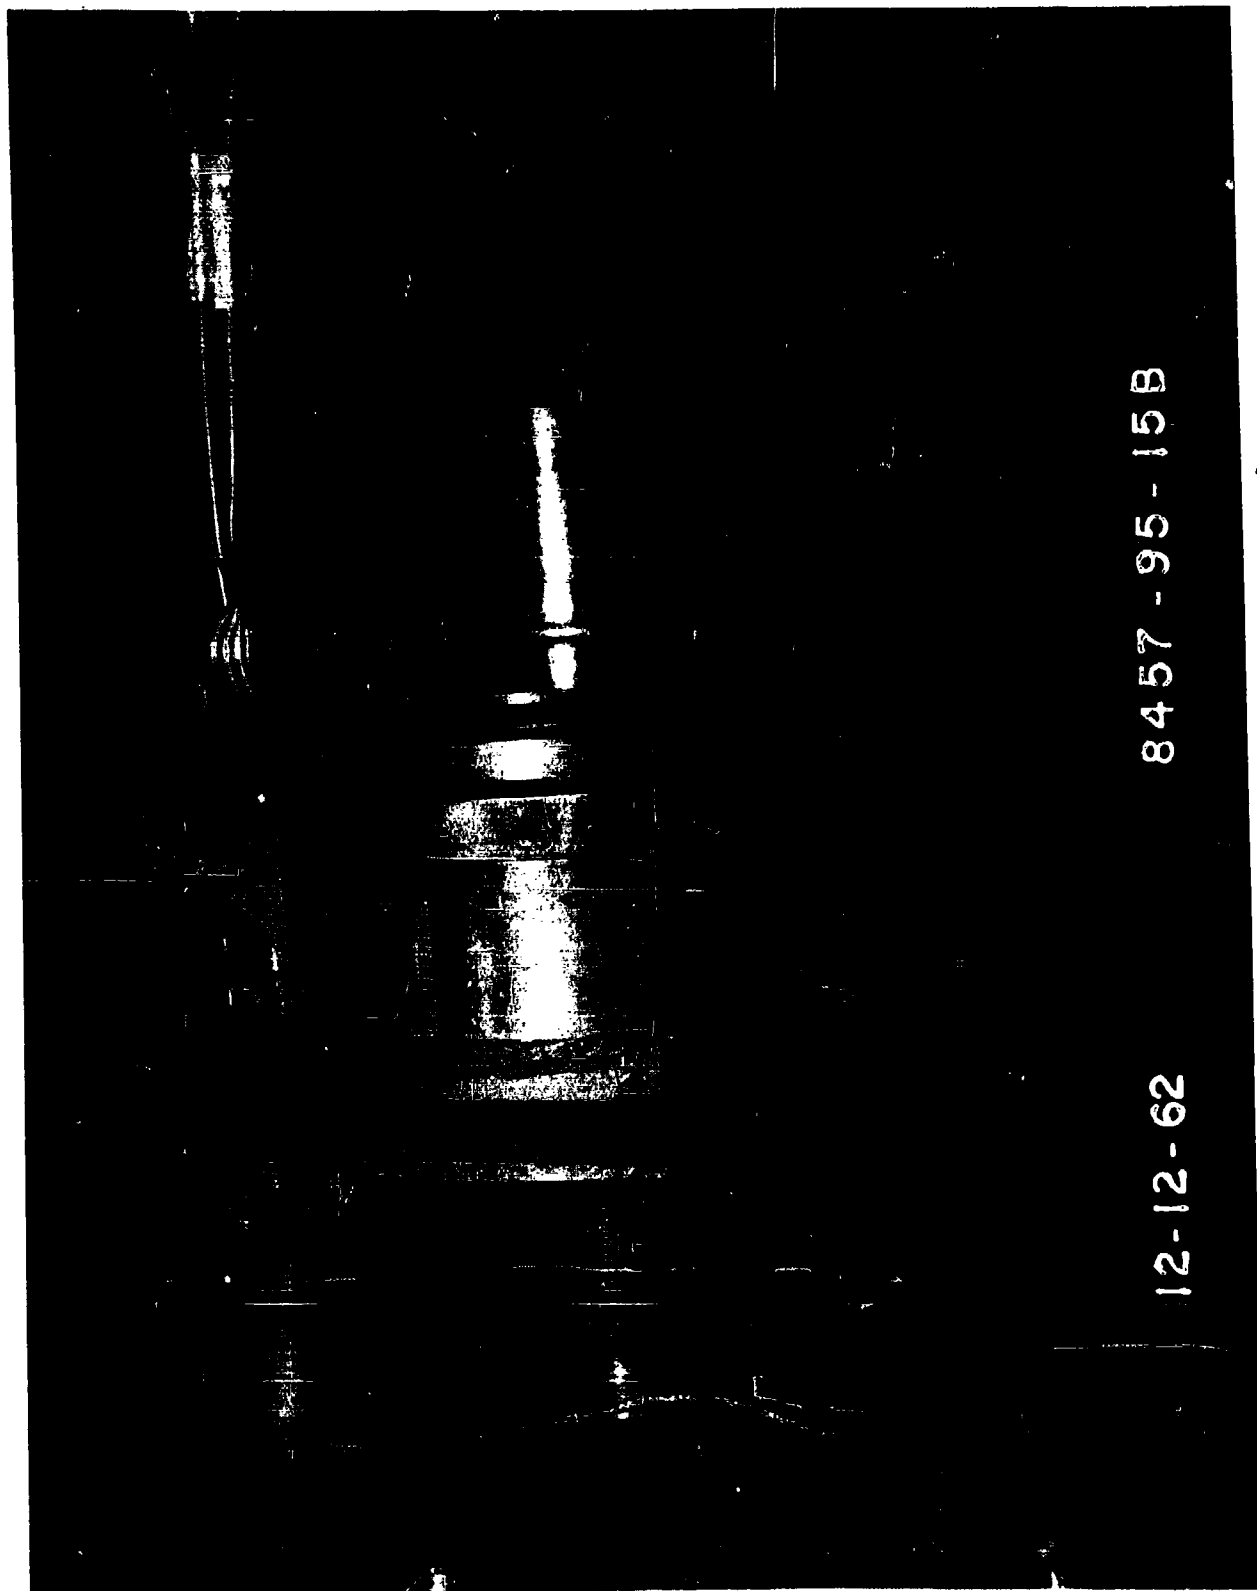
Tube Welding Unit Set Up for Joining One-Inch Diameter Tubing in Area of Limited Access.
